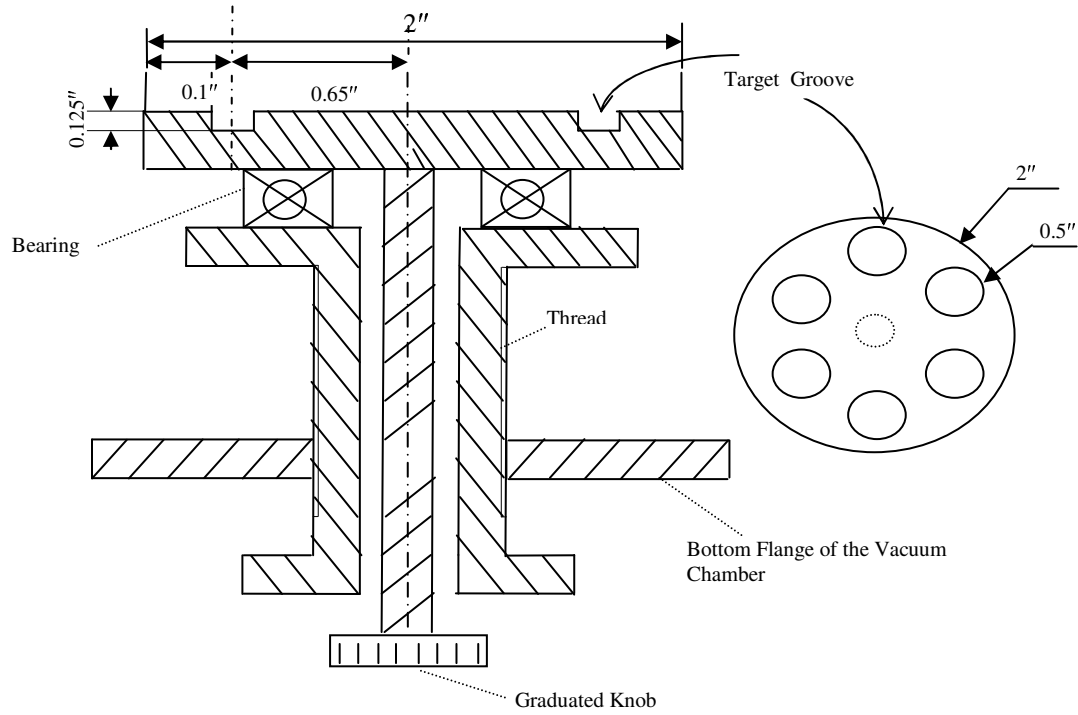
Target holder design to be used in the vacuum chamber (Fig. 7) for thin film deposition.
